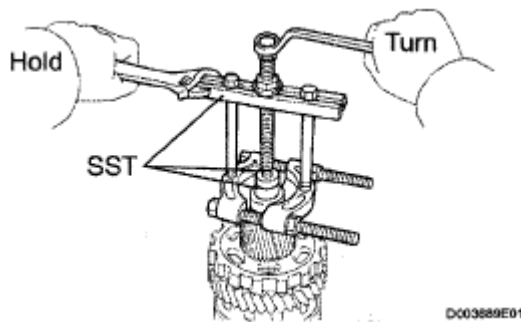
Removing Cylindrical Roller Bearing Race Inner
